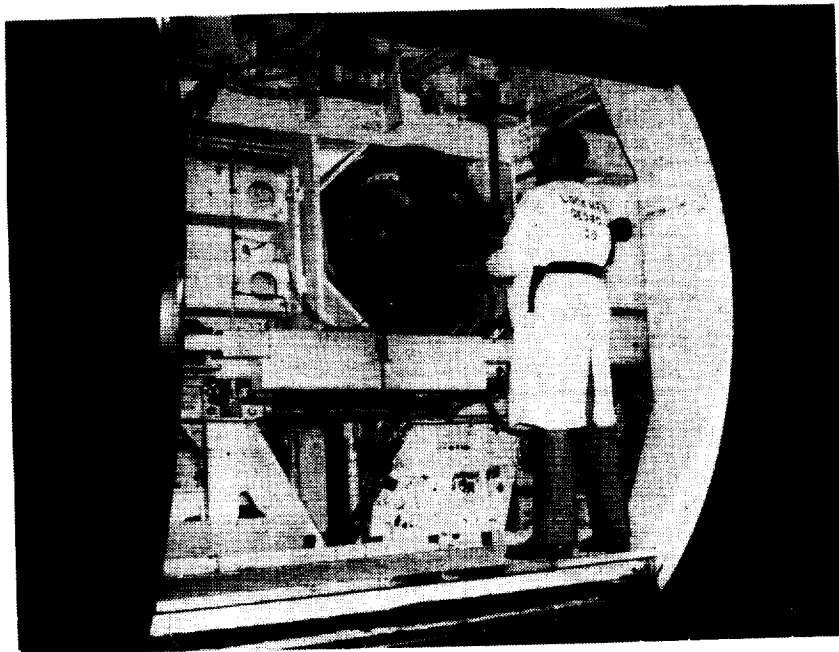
SURFACE ACTUATOR AND MECHANISM INSTALLATION
